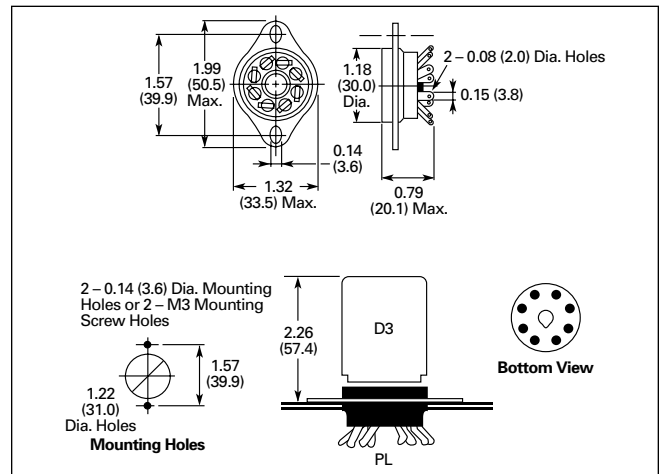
PQC-1332 — Approximate Dimensions in Inches (mm)
